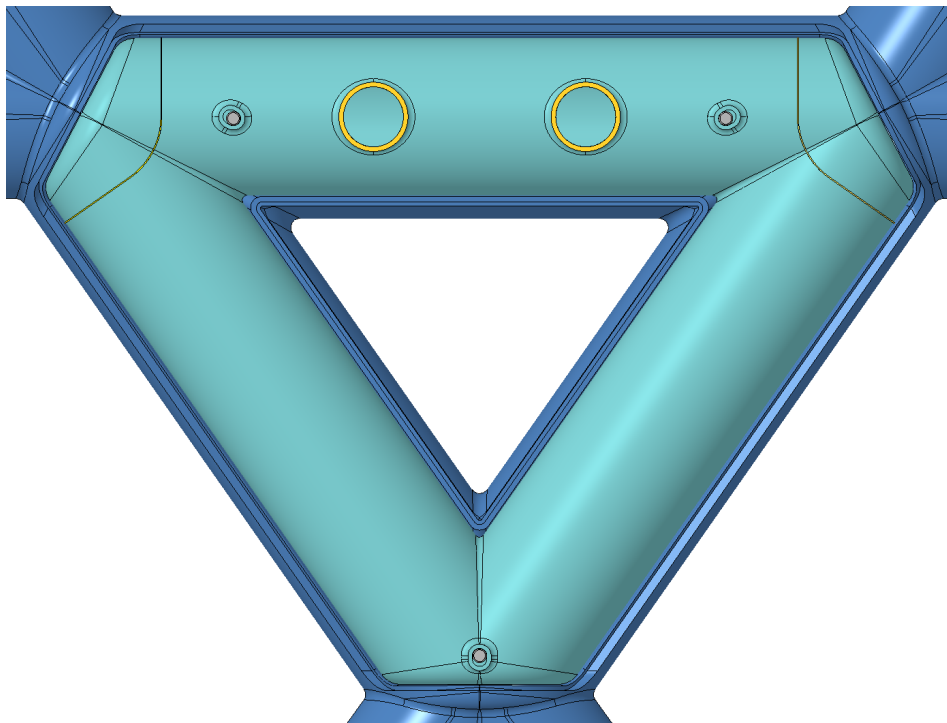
Tube Hydrogen Vessel Assembled into Tube Vacuum Body along with Vacuum Spacers. The opening in the Vacuum Body is designed to just allow the Hydrogen Vessel to pass through.
